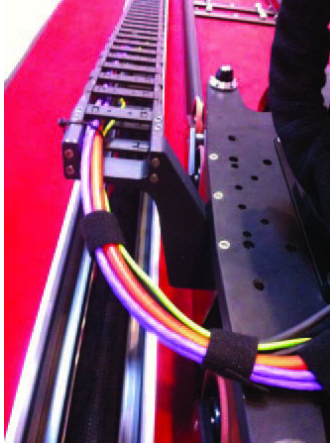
Inspect the Wiredraw Cables for Damage
